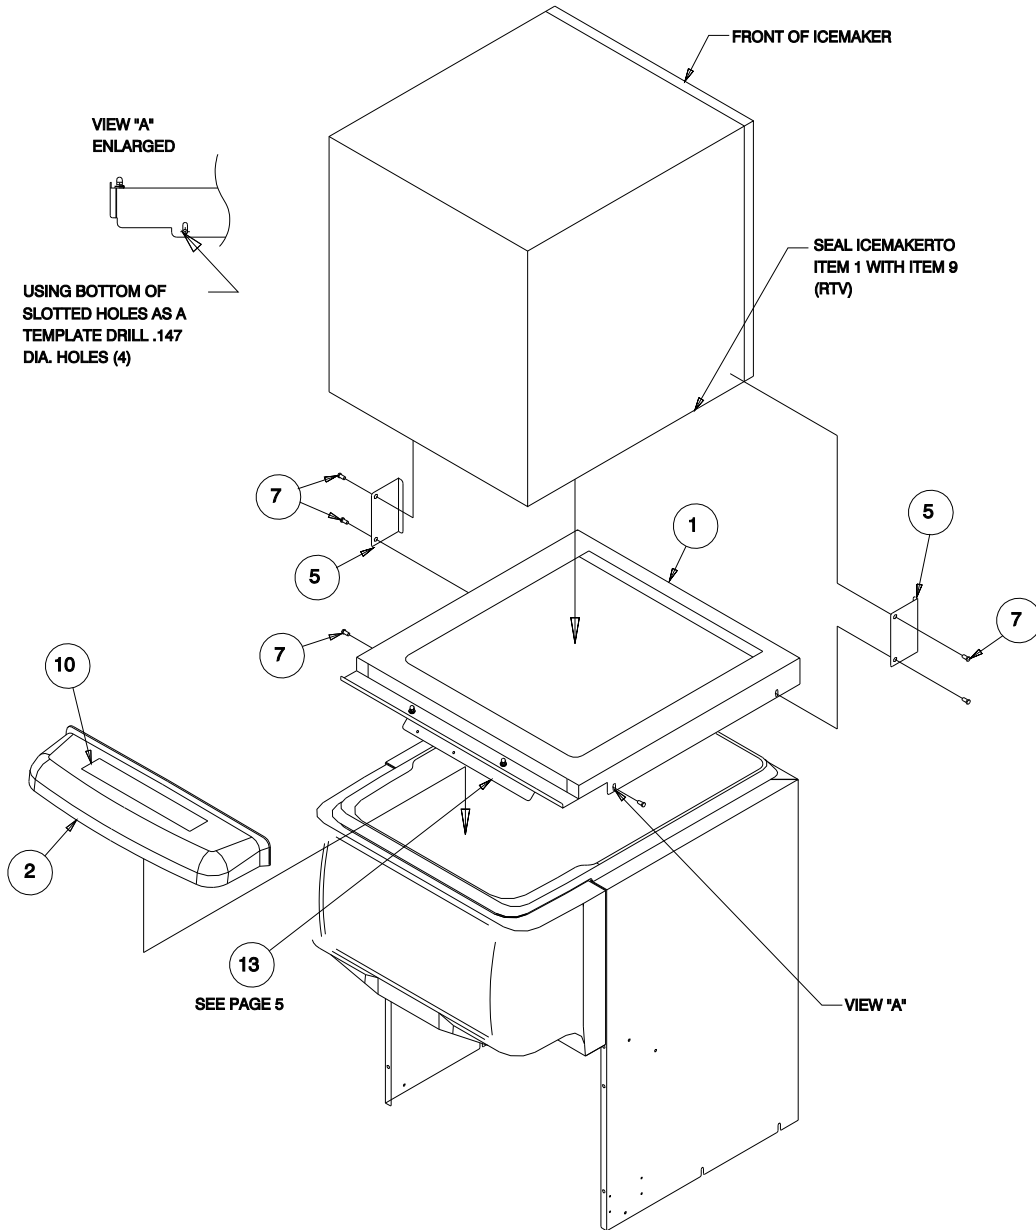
Cornelius "I" Series 30-Inch Dispenser Assembly
